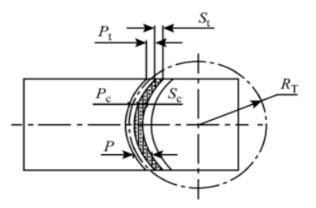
The ideal geometric parameters of cylindrical gears with arcuate tooth trace
